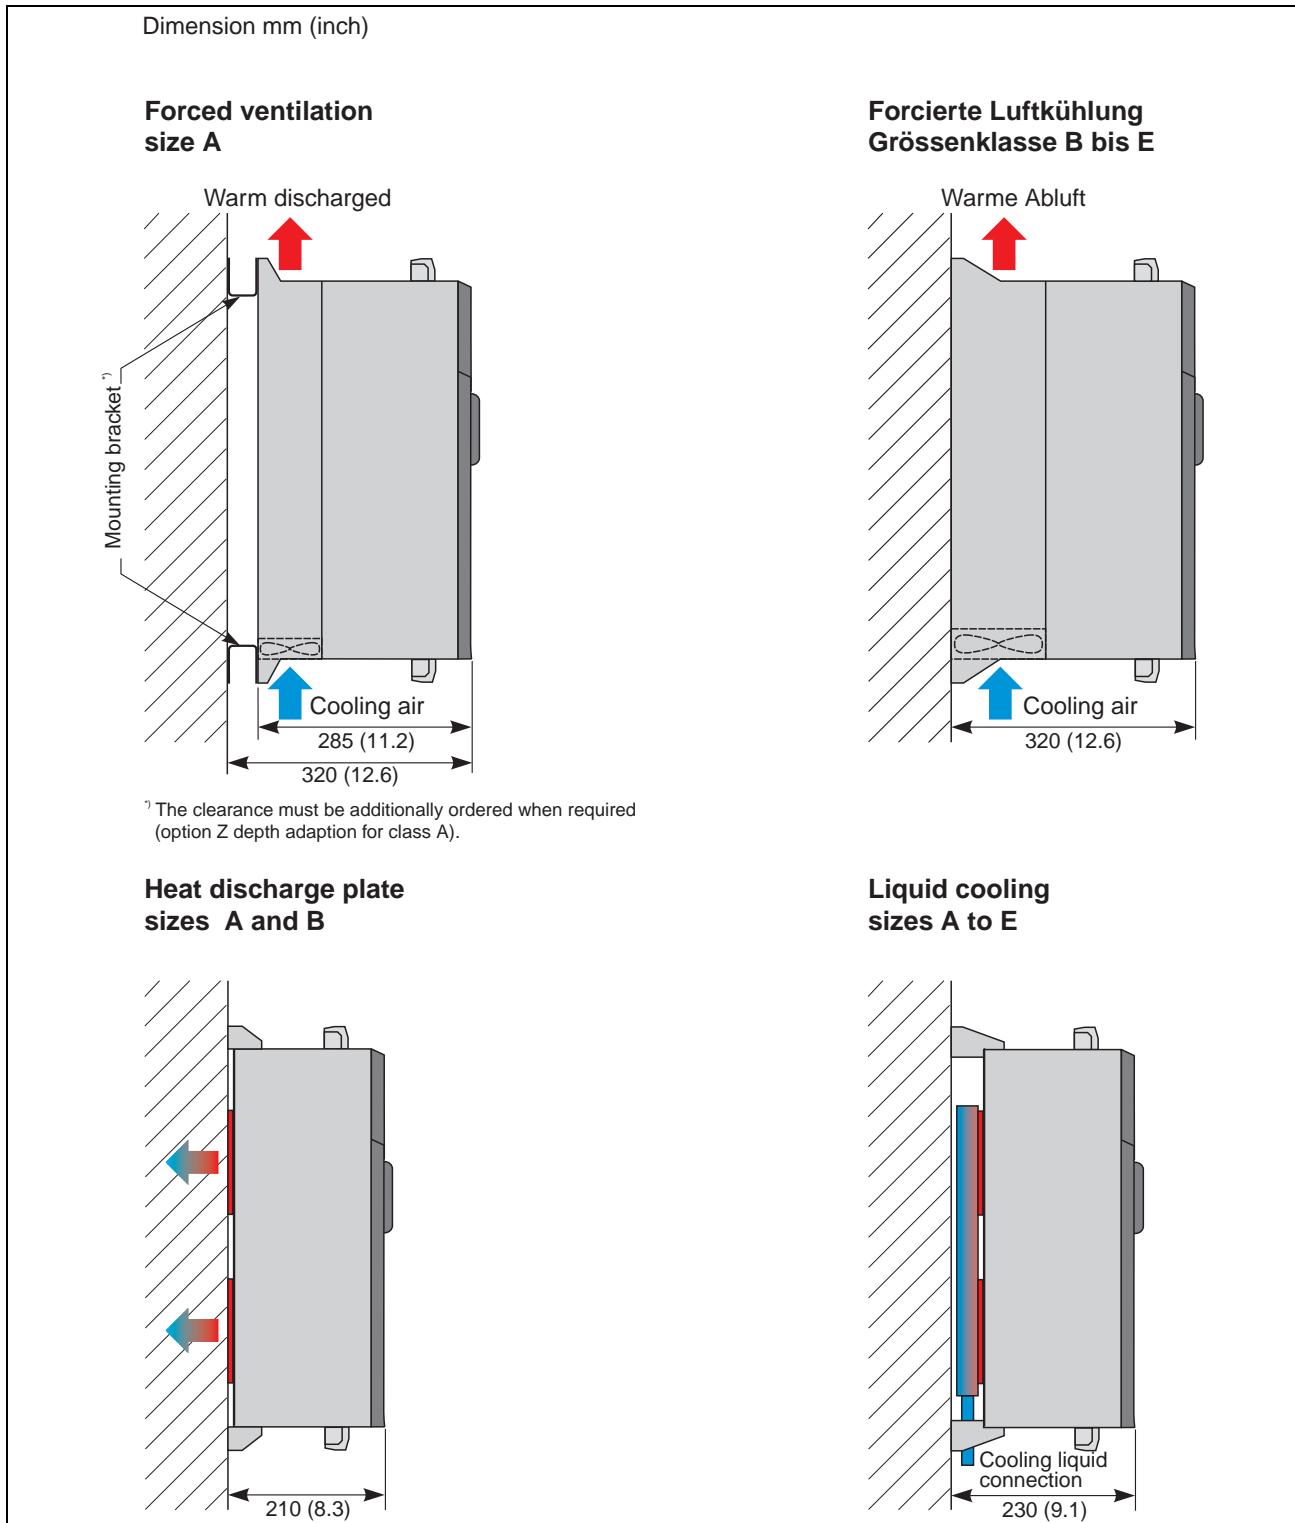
Dimension drawing side view, size class A to E with different cooling types
